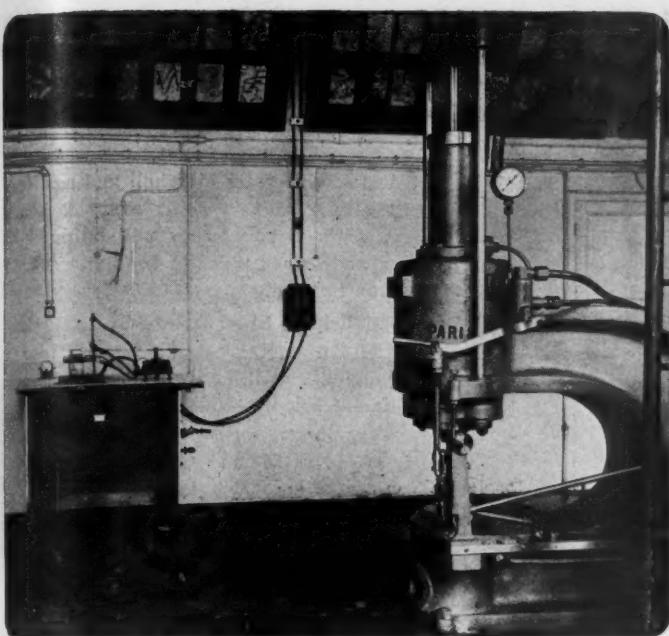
PUNCH MACHINE AND CARBON MEASURING APPARATUS
